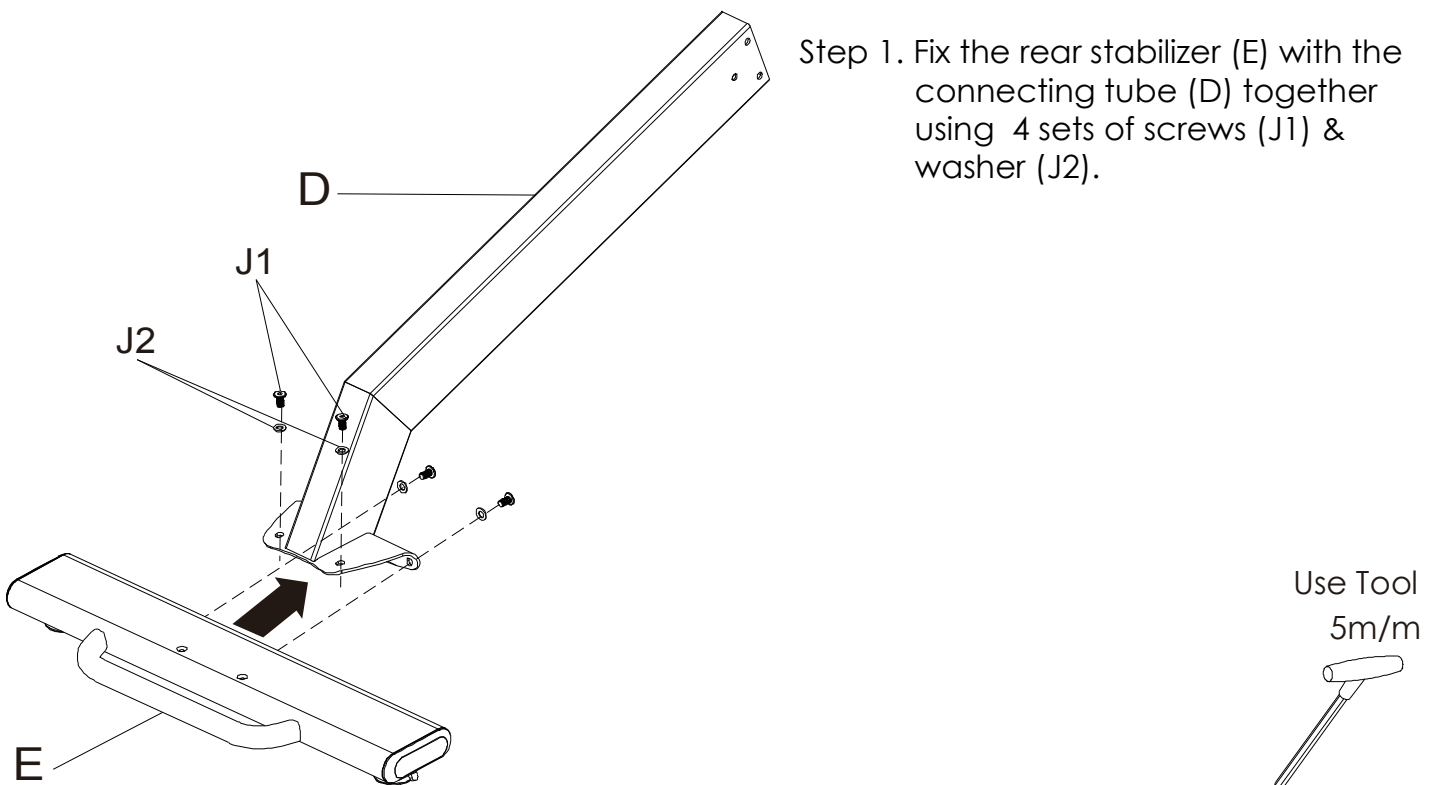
CONNECTING TUBE (D&E) AND MAIN FRAME ASSEMBLY
